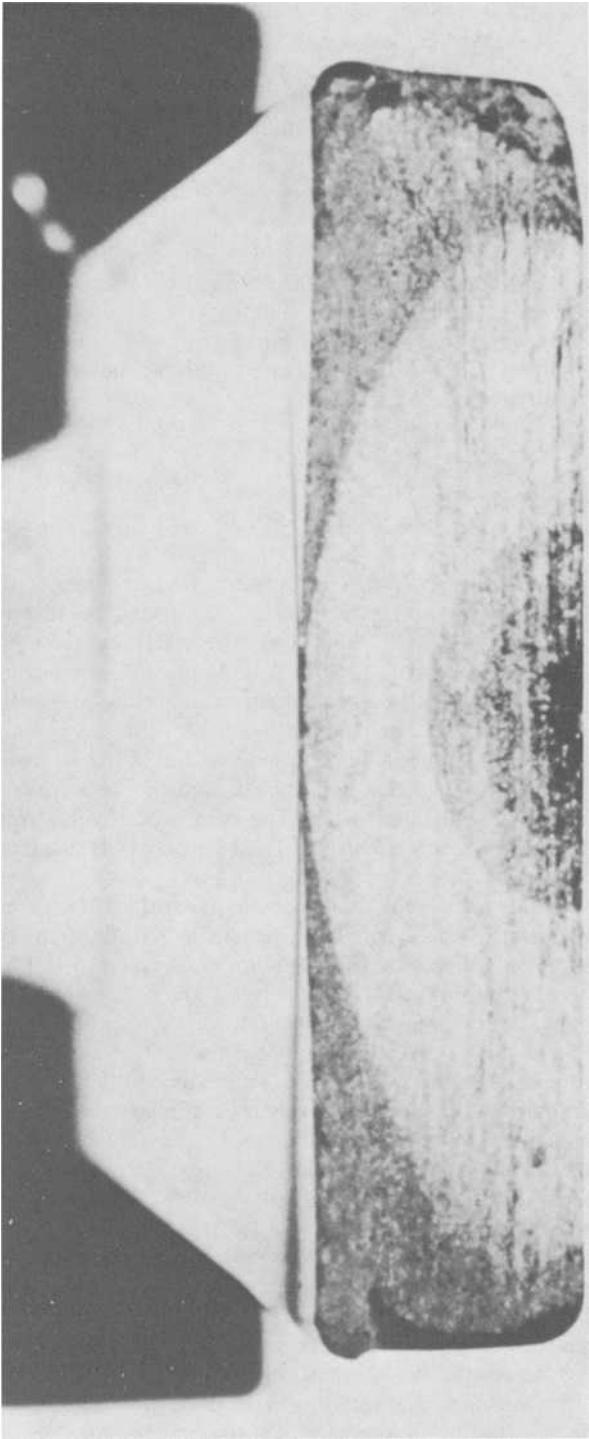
Tension specimen with surface fatigue crack growth markings.
